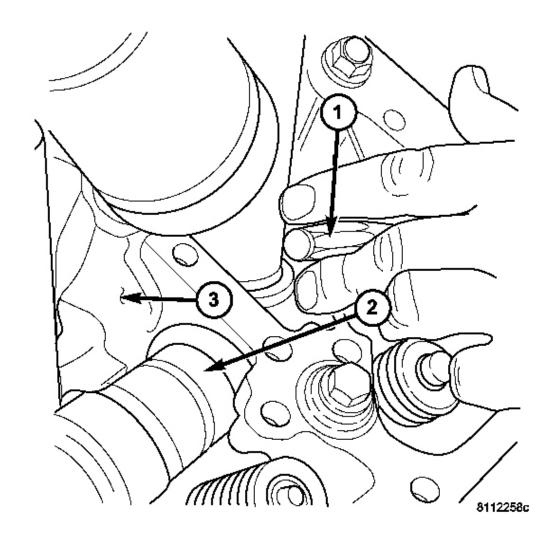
Camshaft Thrust Plate, Bolt & O-Ring Courtesy of CHRYSLER LLC
